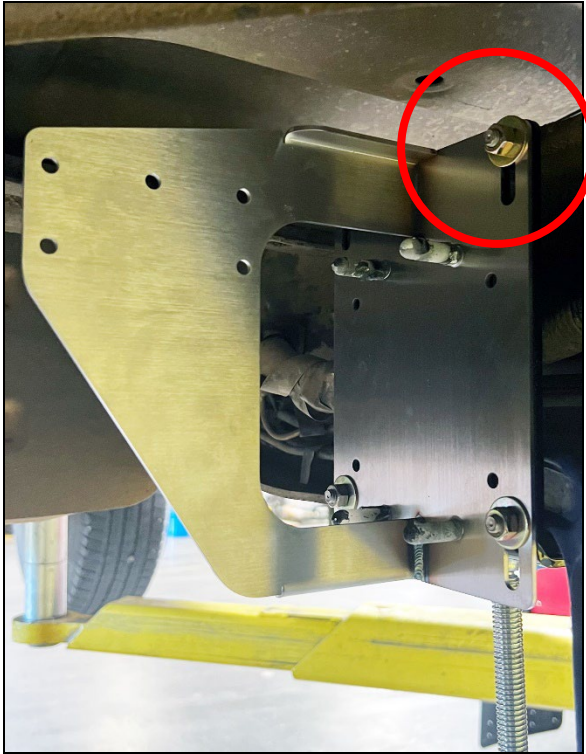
Pump Outlet View – “Inside the Frame” Orientation
